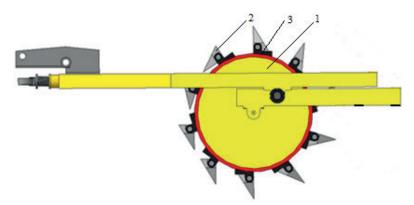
General view of the cam roller [8]: 1 - road skating rink; 2 - cam; 3 - spring-loaded latch
